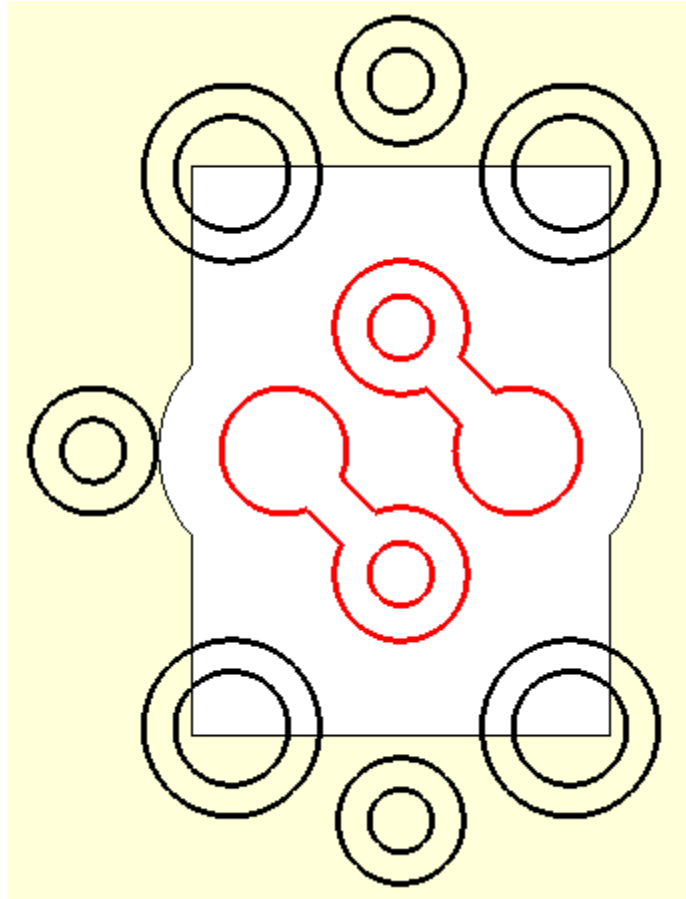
Paladin HD Footprint Layer 1 Anti-pad Shape
